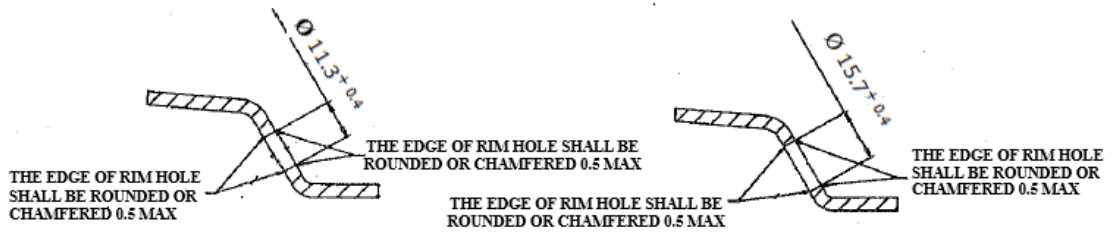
MEASUREMENT OF CYLINDRICAL BEAD SEAT RIM
